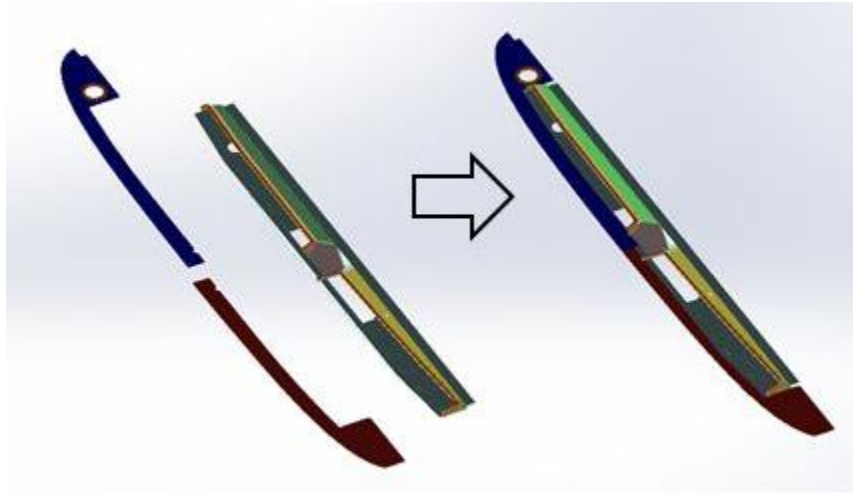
The original 3 D view of the defroster plenum assembly [1]
